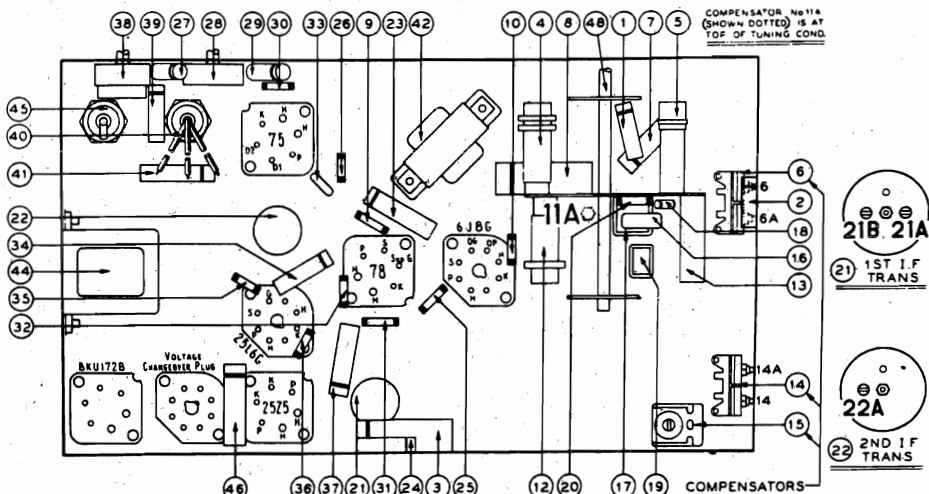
Part Locations, Model 39-711, Underside of Chassis
